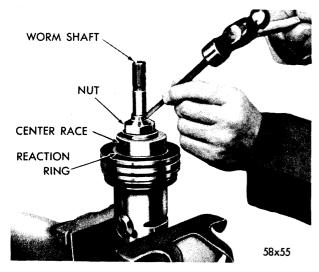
Locking Worm Shaft Bearing Adjusting Nut
